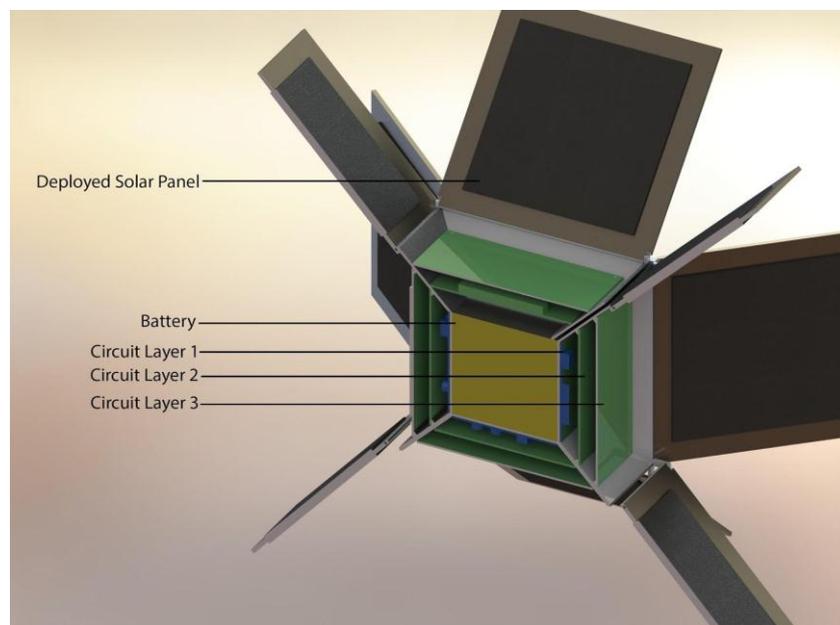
Cross sectional view of assembled nanoSat with solar panels deployed.
